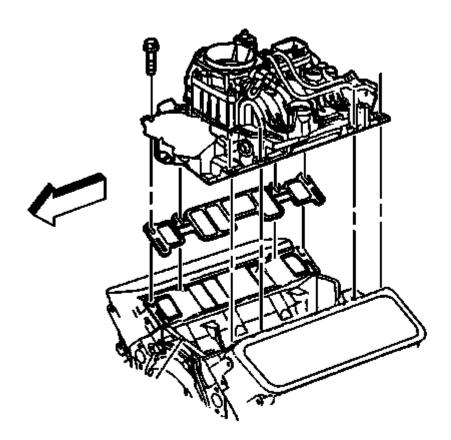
View Of Intake Manifold Assembly & Bolts Courtesy of GENERAL MOTORS CORP.
